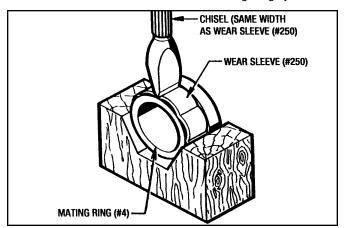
Wear Sleeve Removal (#20 Posidyne Only)
